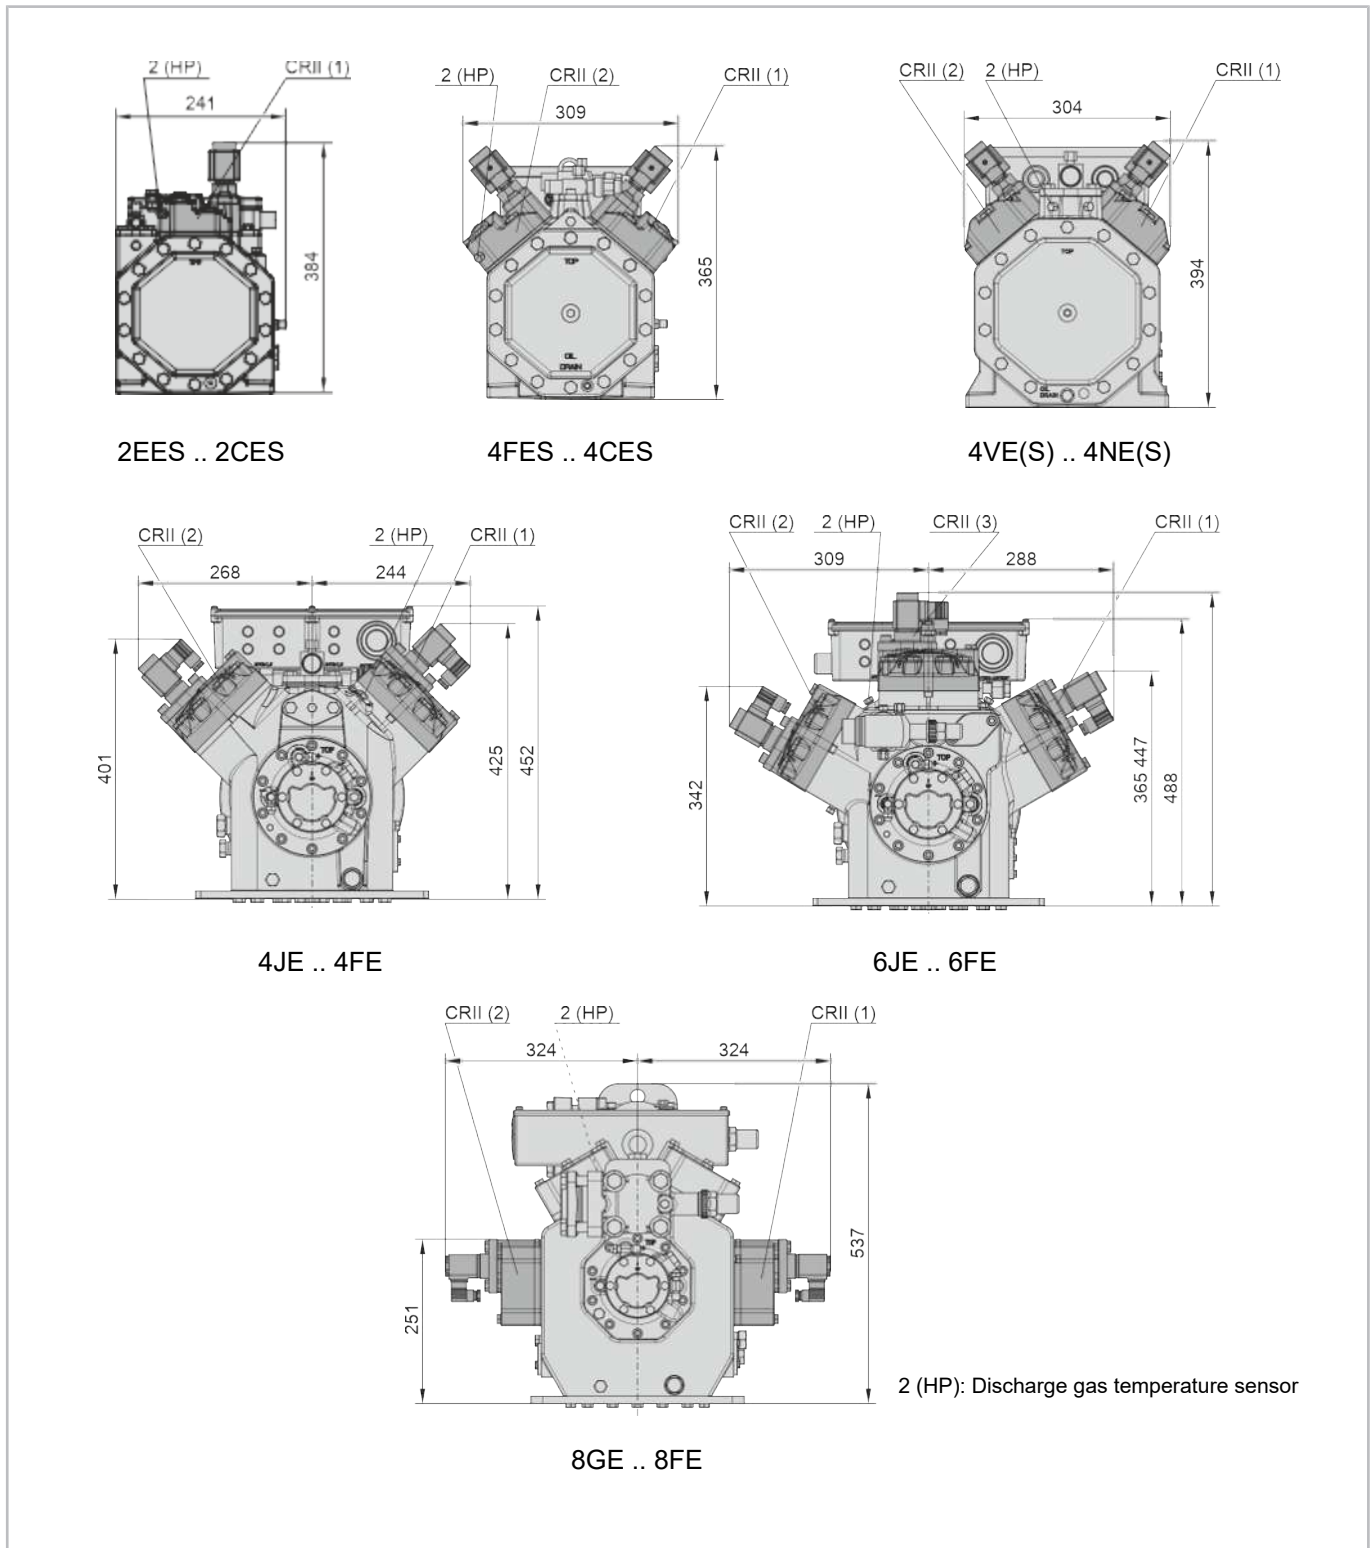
Semi-hermetic 2-, 4-, 6- and 8-cylinder compressors with full CR11 equipment (without compressor module)
